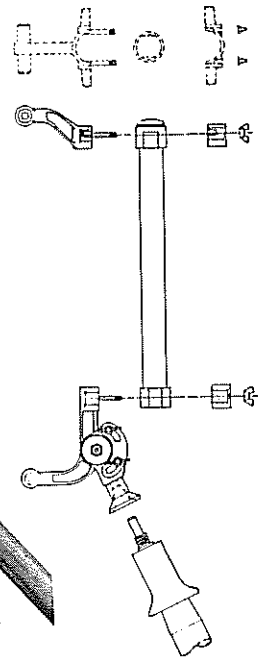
Showing S&C Fuse Removed from Fuse-Ferrule Clamps
